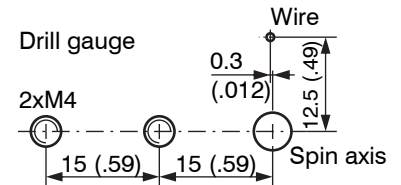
Dimensional drawing WDS - ... - MP / MPW, dimensions in mm (inches)
